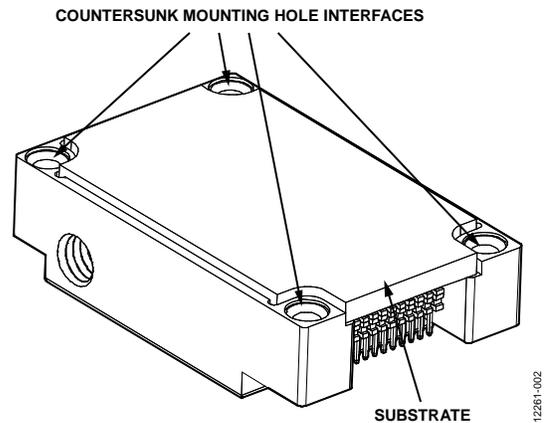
[ADIS16448 AMLZ](#), Bottom View
